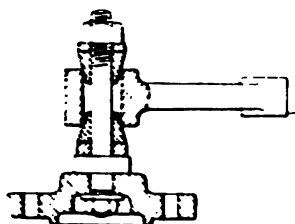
Cone Mandrel to bolt on Circular Table.
